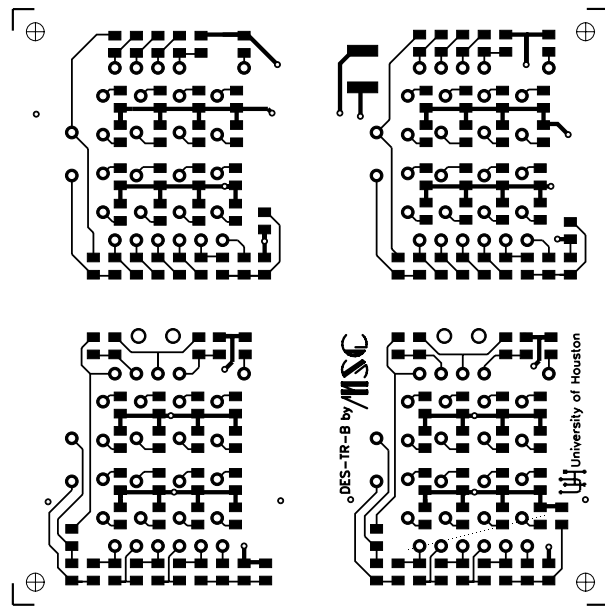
Baseboard photomultiplier tube side inner layer.
